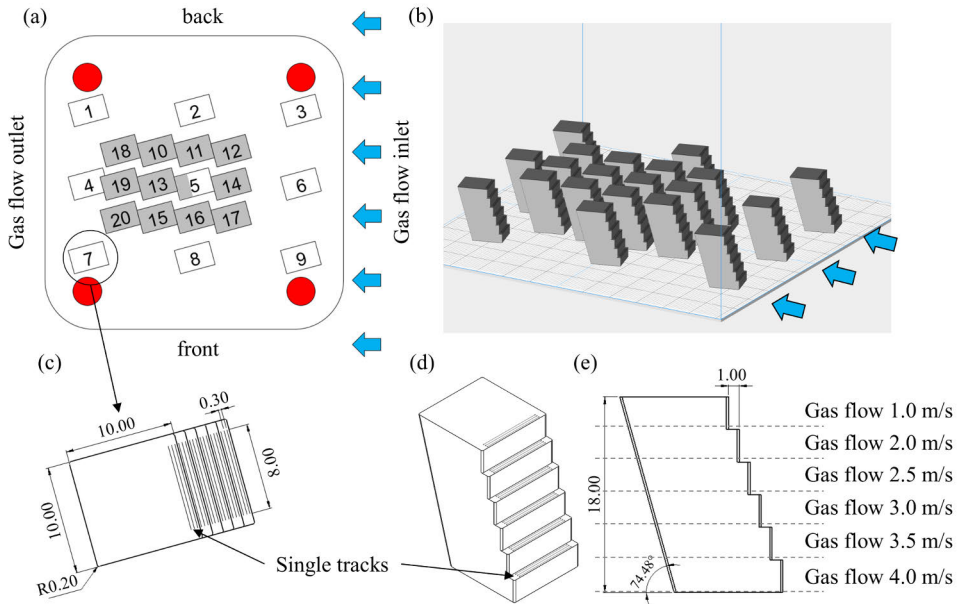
Build layout for Publication I: (a–b) specimen placement on the building platform, (c–e) specimen geometry, dimensions, single track positions, and gas flow steps.
